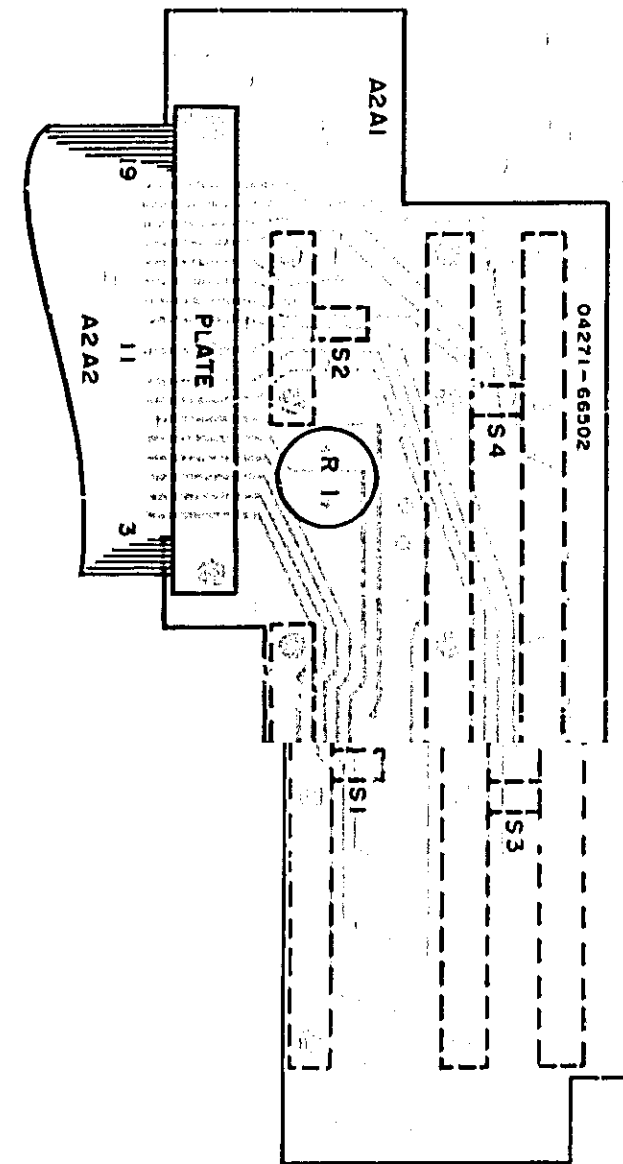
A2 Control Switch Board Assembly Component Locations.
